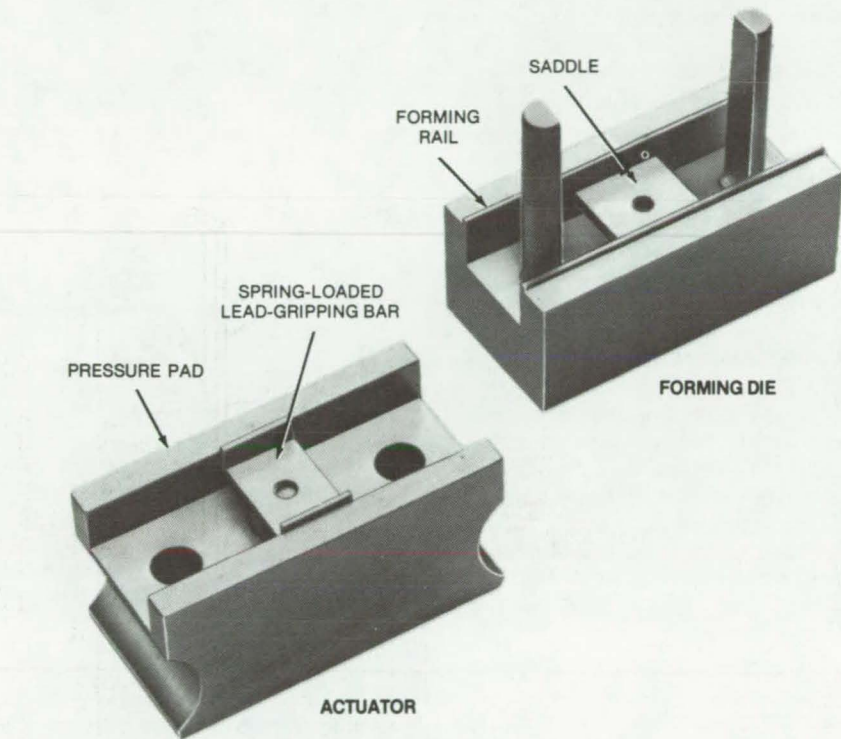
The Lead-Forming Handtool has two parts: a forming die, shown at the right, and an actuator. The spring-loaded saddle is adjusted so that when the transistor package is placed on it, the leads rest on the forming rails.
